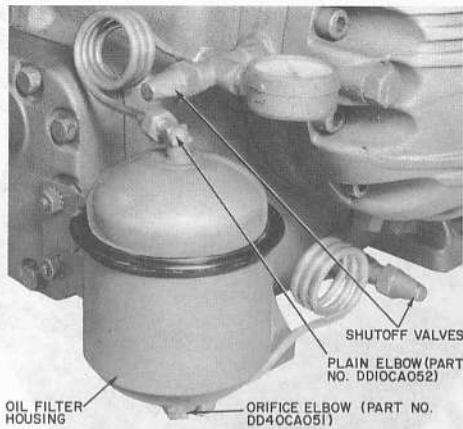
Oil Filter Accessory Package (5H40 through 5H86)
